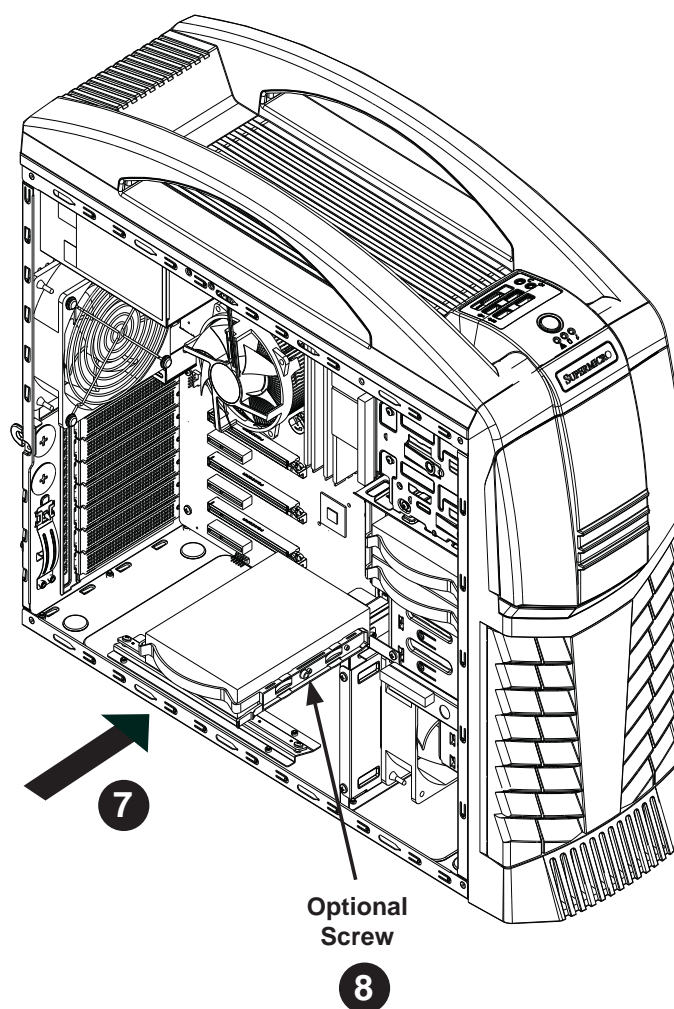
Installing a Hard Drive Carrier into the Hard Drive Cage
